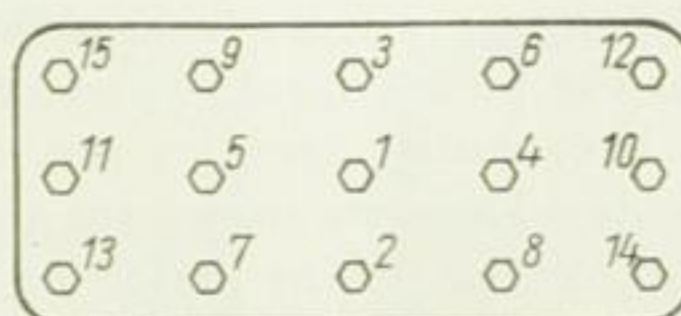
The cylinder-head screws must be tightened in the specified sequence
